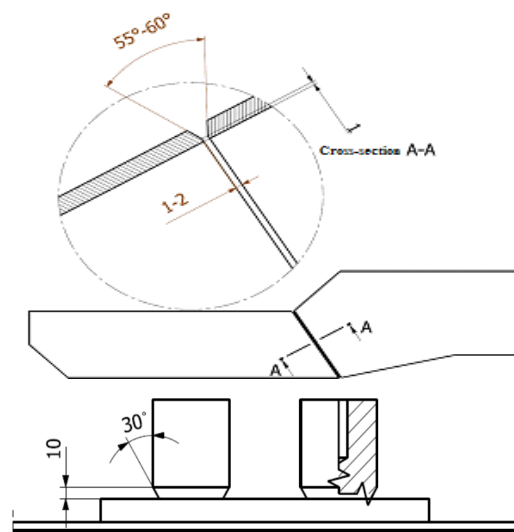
Appearance of the preparation of new components for welding at the carrying structure and embedding of the rejecting drum
